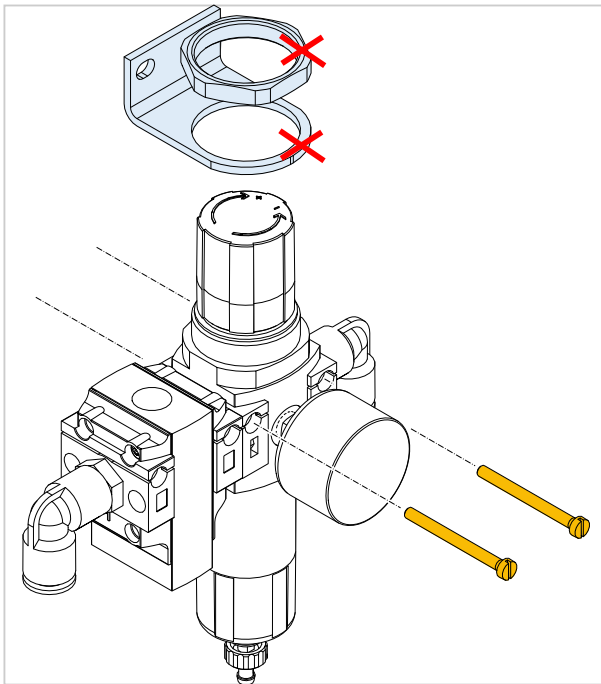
Mounting the service unit without mounting bracket (bracket and hex nut can be layed aside).
